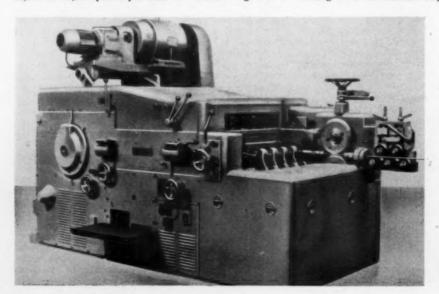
Hatebur automatic, progressive, cold-heading machine, Type BKA-3
